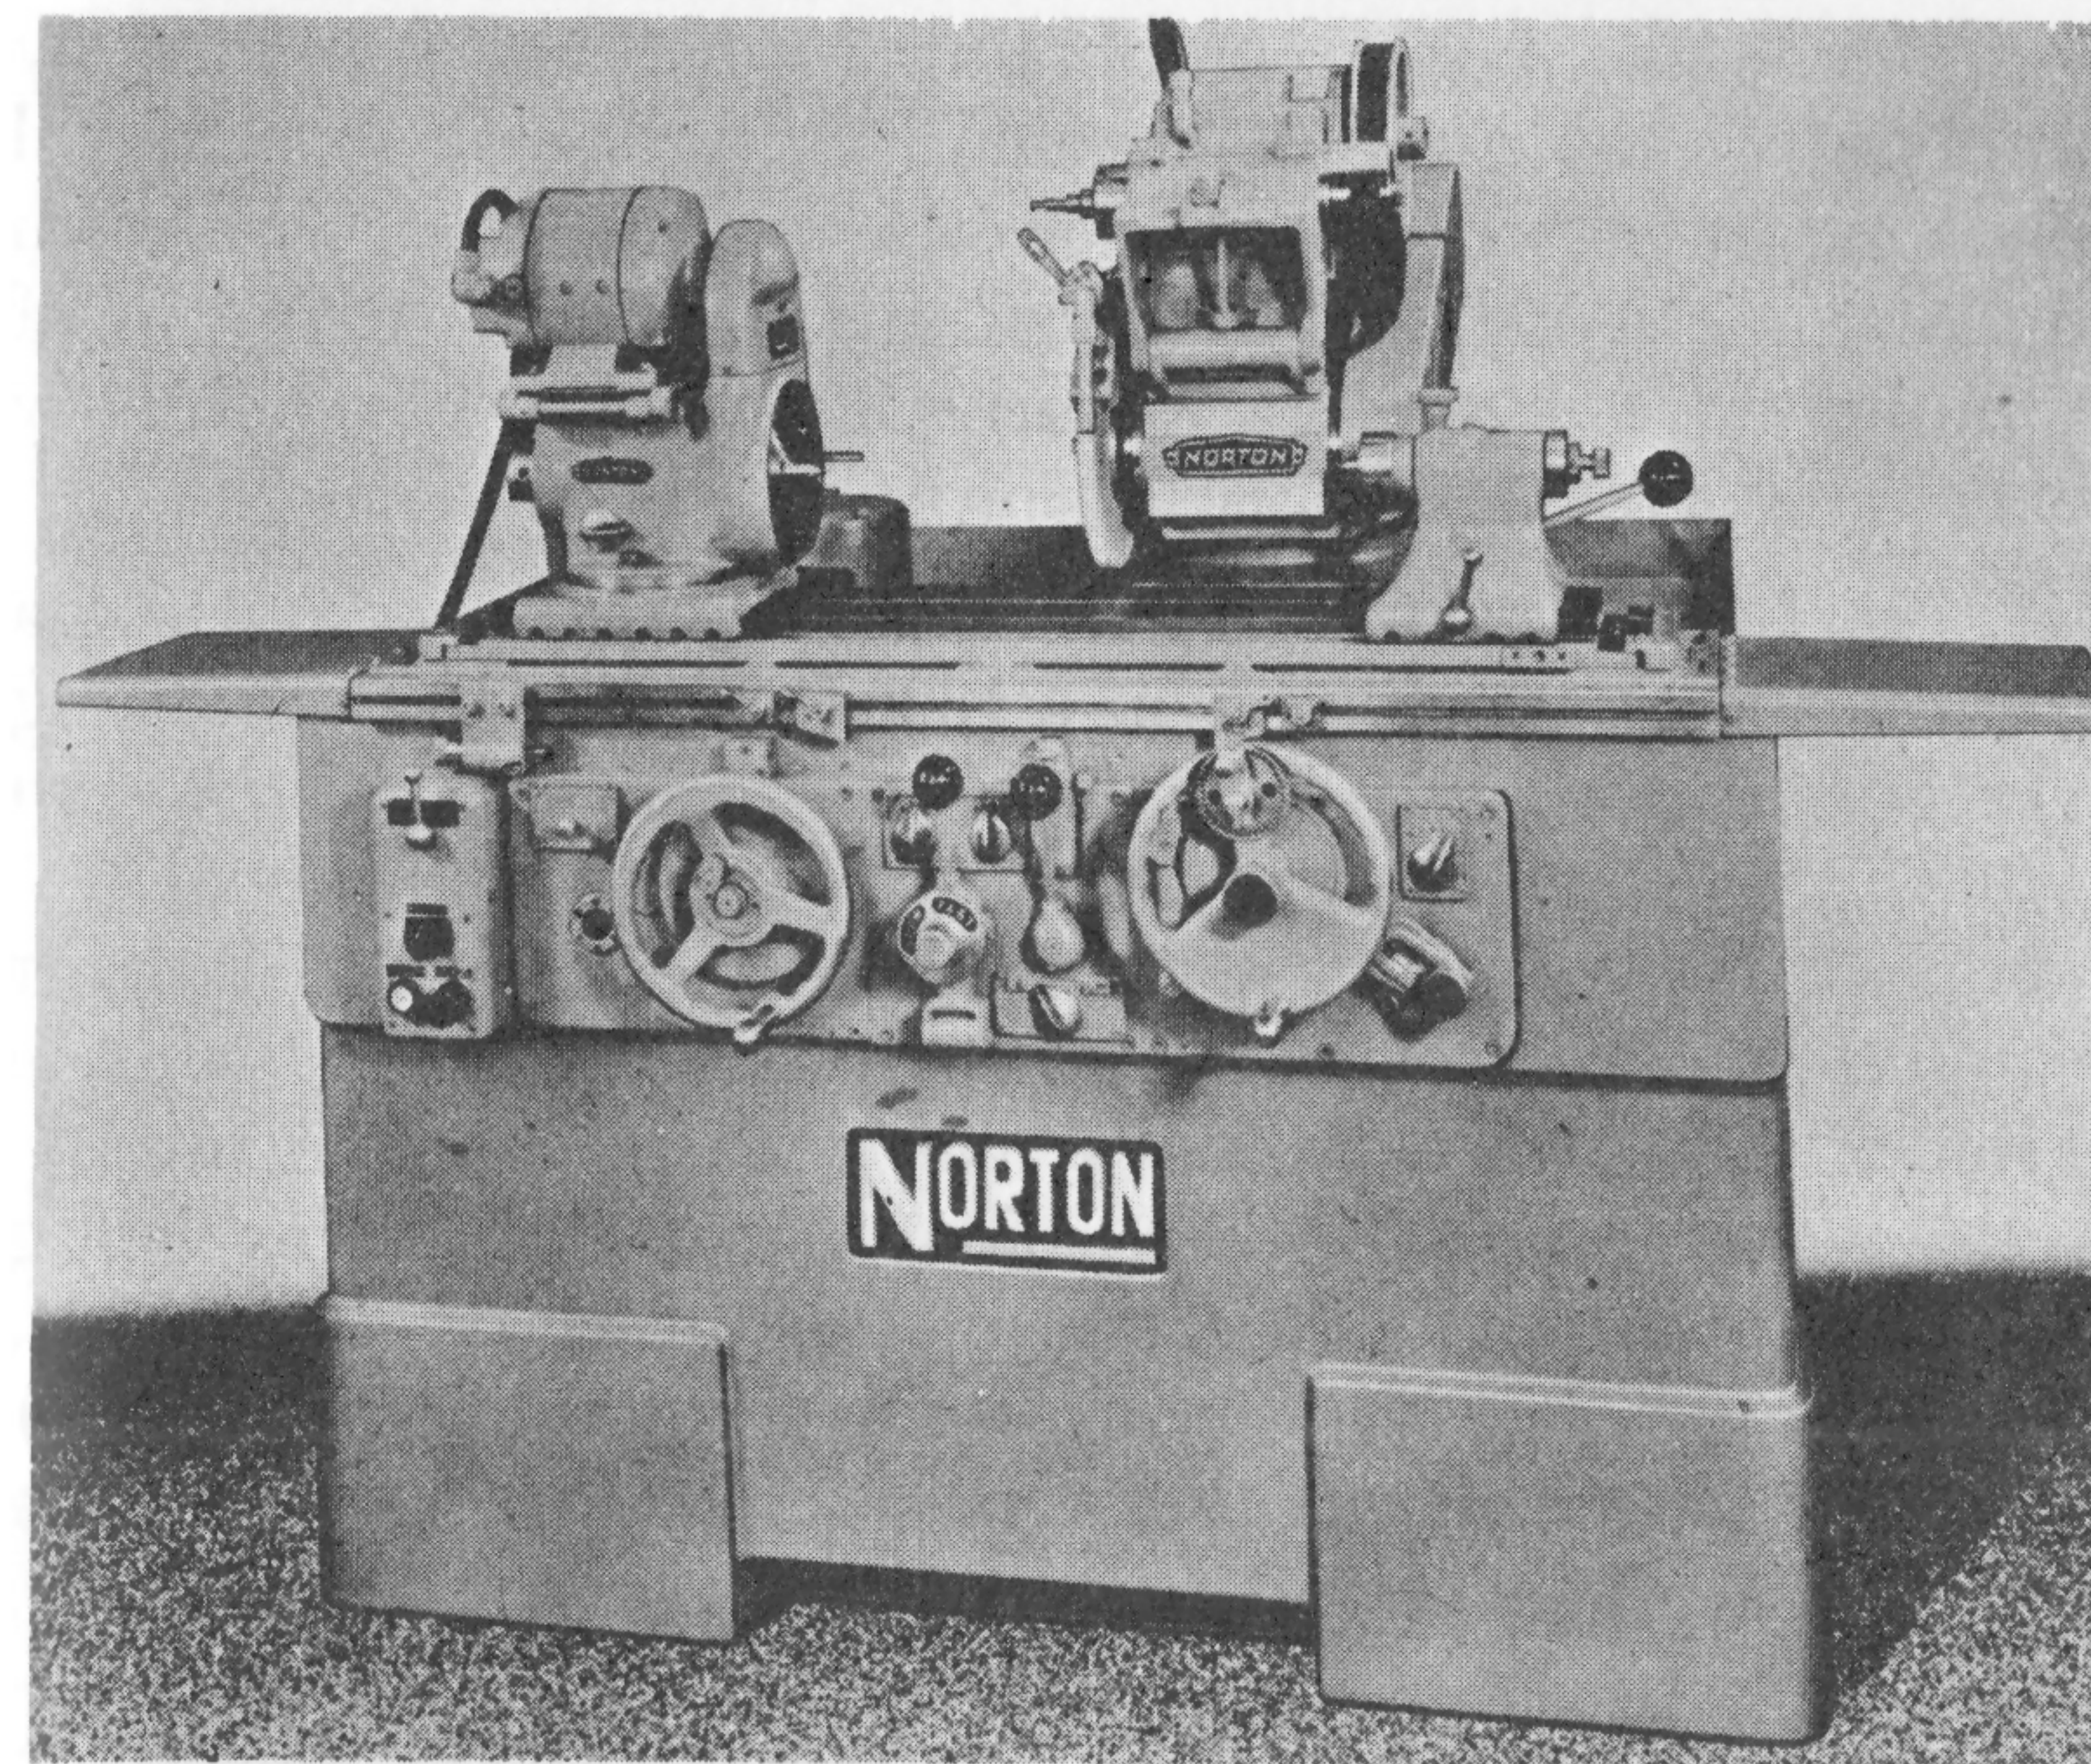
A MODERN UNIVERSAL GRINDING MACHINE, 1957 (Norton Company)
